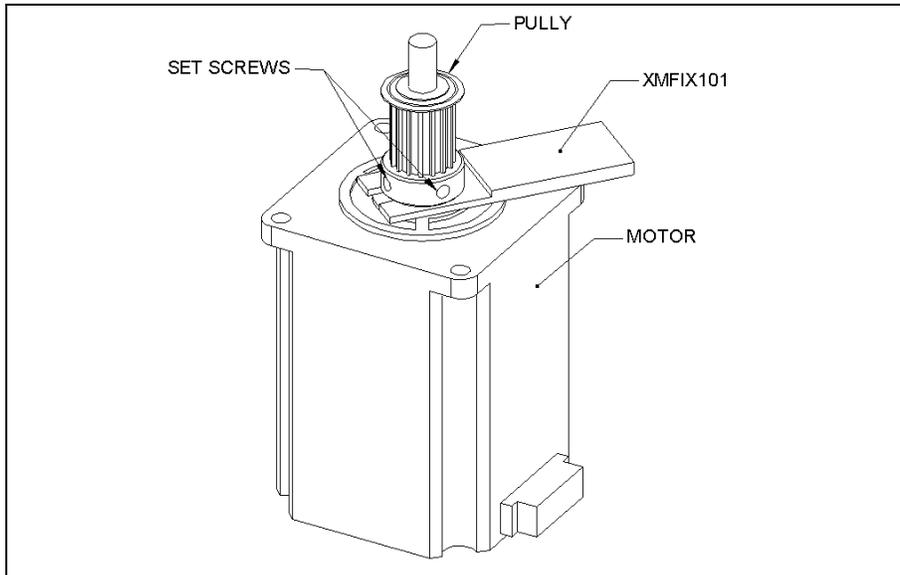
Affixing the Pulley to the X-Drive Motor
